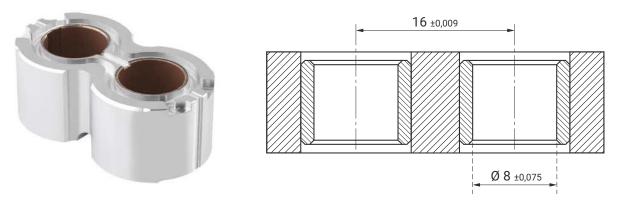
Critical dimensions and target tolerances on bushing block assembly
